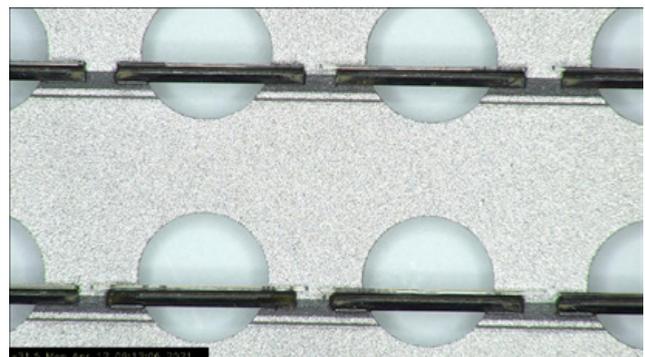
An optical image of the completed assembly mount showing the three parts of the completed target
